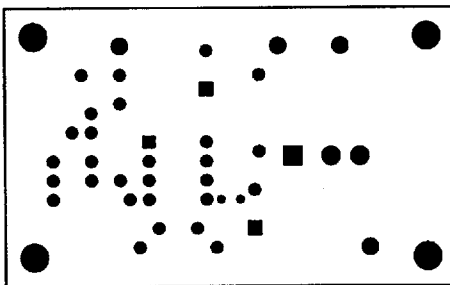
DIP PC Layout, Drill Guide (1X Scale)
